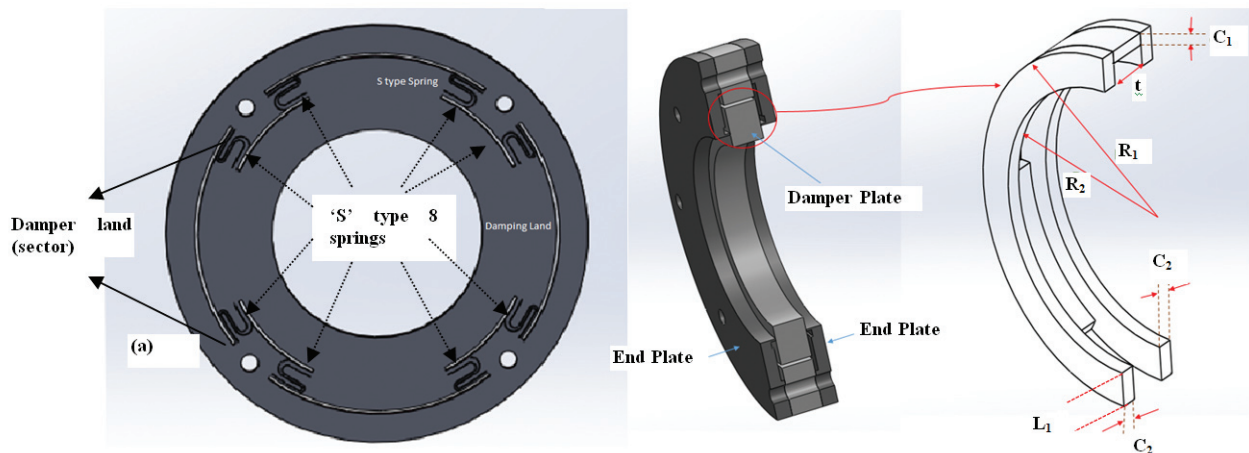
(a) Damper plate (b) Cross sectional view of damper assembly and damping land and fluid channel.
